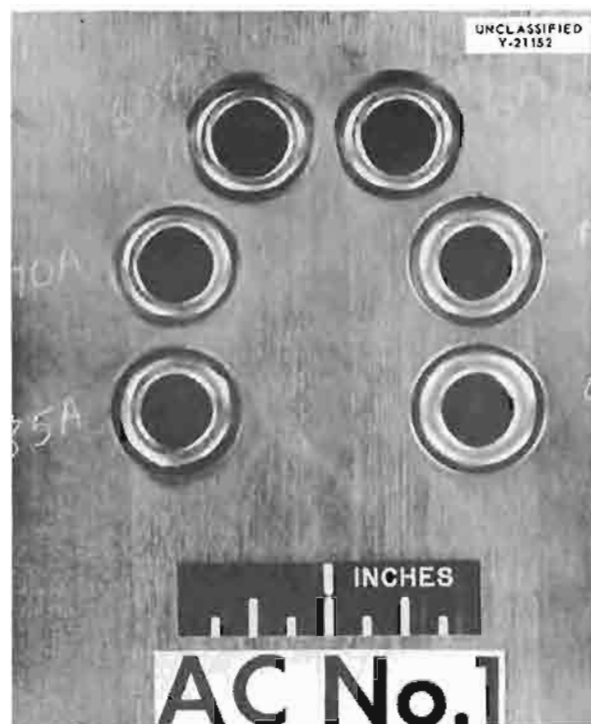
Tube-to-Header Joint with Trepanned Design.
